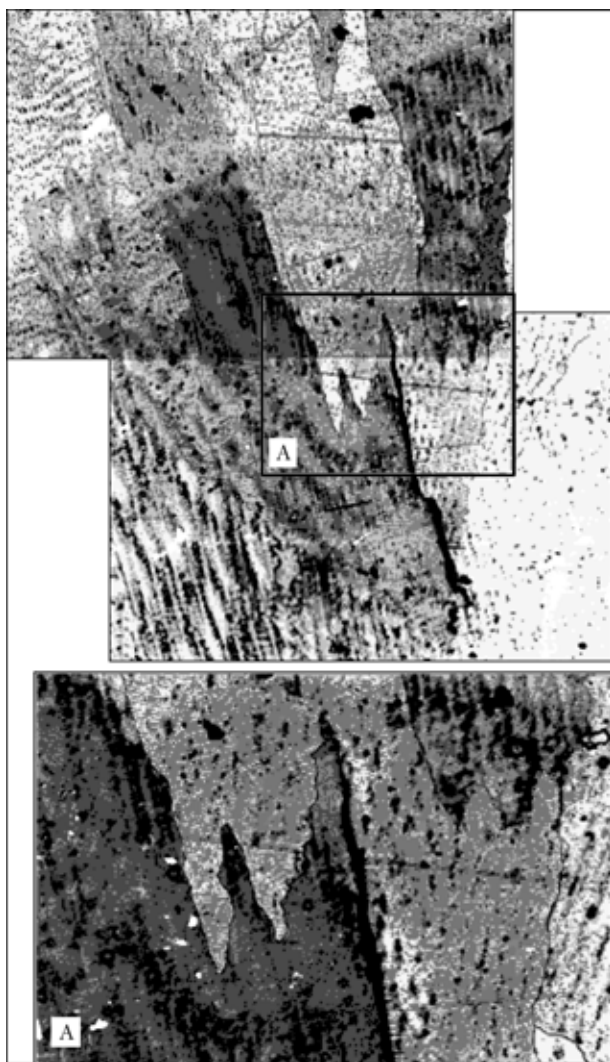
Microstructure of weld metal with underbead hot crack in multi-layer welding of alloy 36NKh ($\times 200$; A — $\times 400$)
